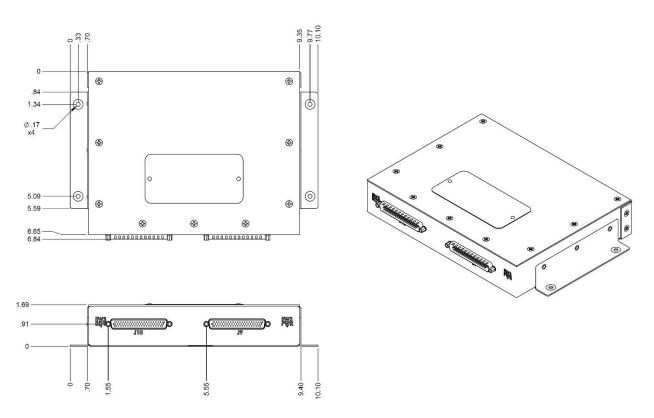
SVS (EWS) Dimensions and Mounting Dimensions
